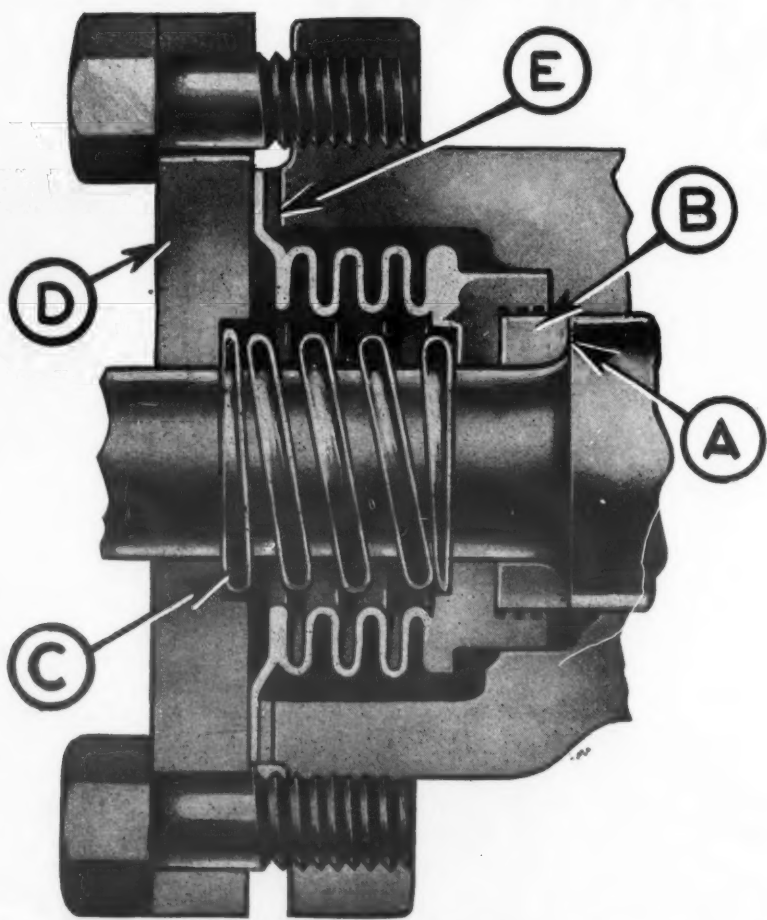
Frigidaire stuffing box seal assembly. (A) Eccentric shaft shoulder; (B) bronze thrust collar or seal nose; (C) spring; (D) retainer plate; (E) gasket.
